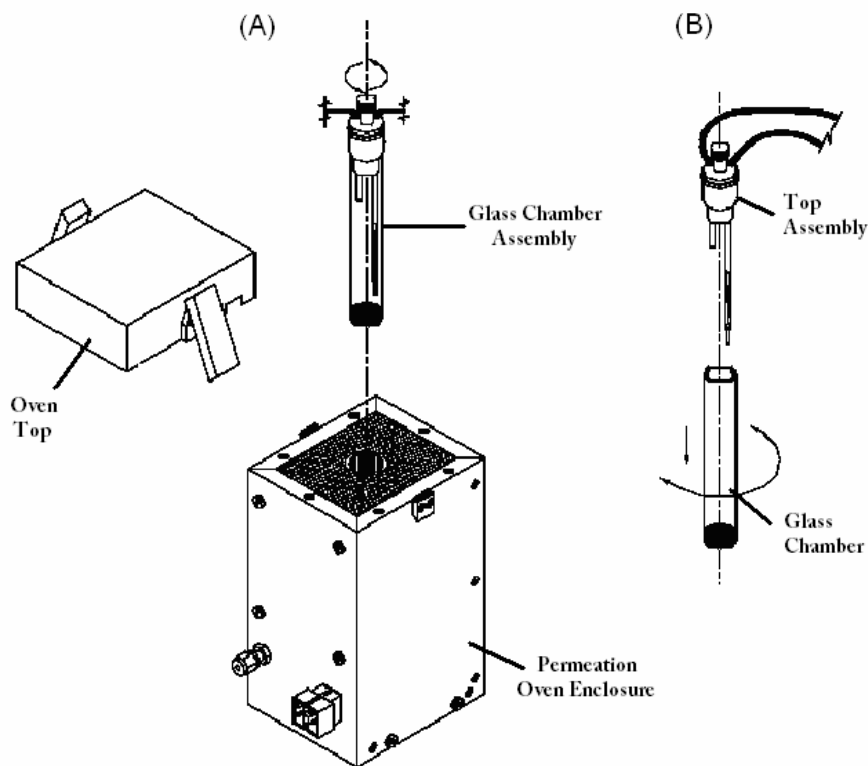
Removing glass chamber from permeation oven (A) and removing top assembly (B).
